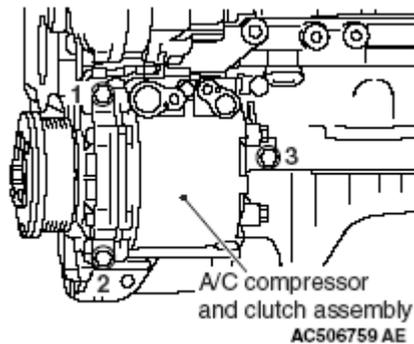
Identifying A/C Compressor And Clutch Assembly Mounting Bolts
